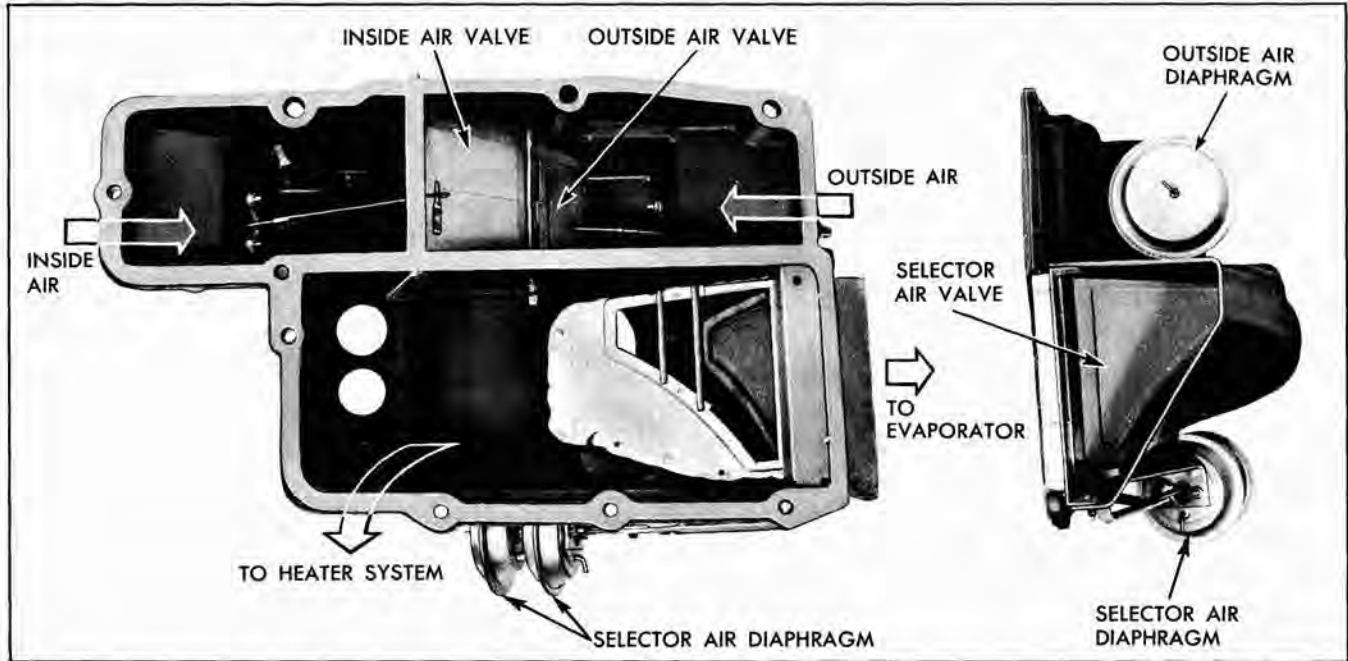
Blower and Air Inlet Duct Assembly—Air Flow
